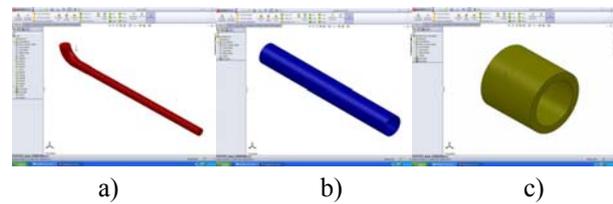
Ensemble elements: a) mandrel; b) blank product; c) pushing system.
